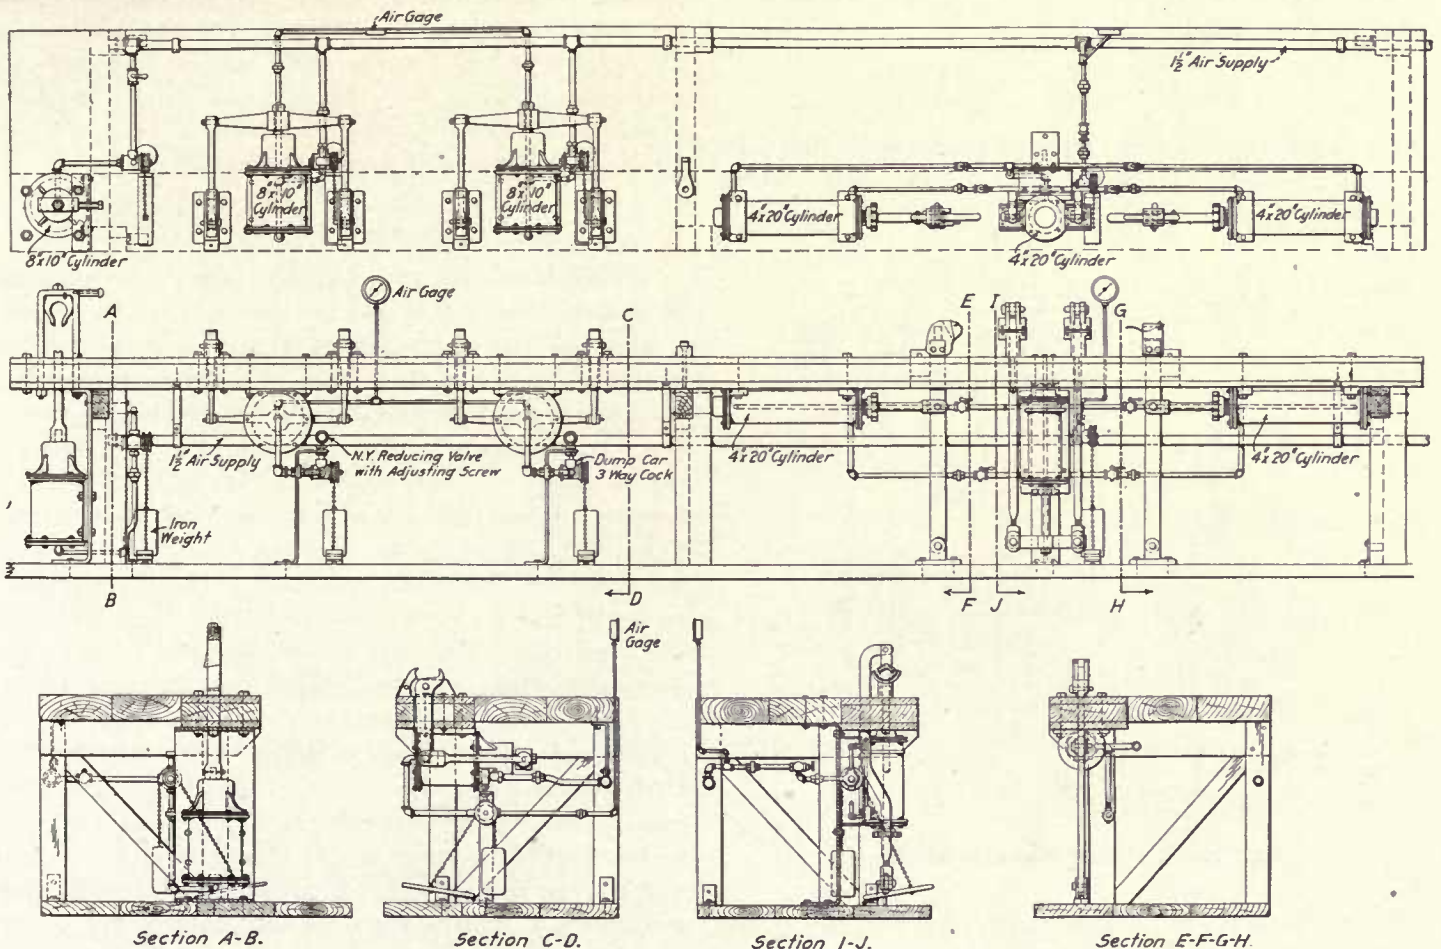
Bench Equipment for Fitting Up Air Hose.
